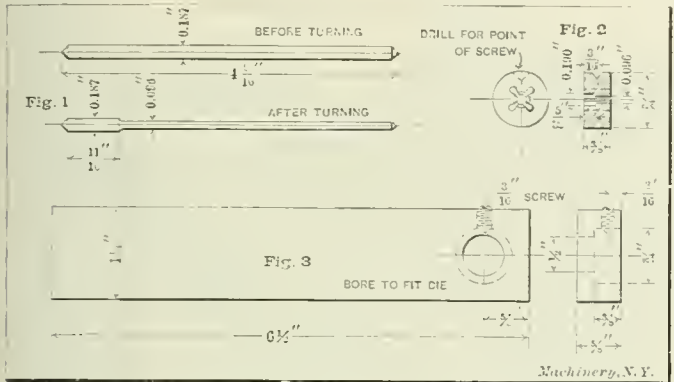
Work before and after Turning. Fig. 2. The Turning Die. Fig. 3. Toolholder in which the Die is held
